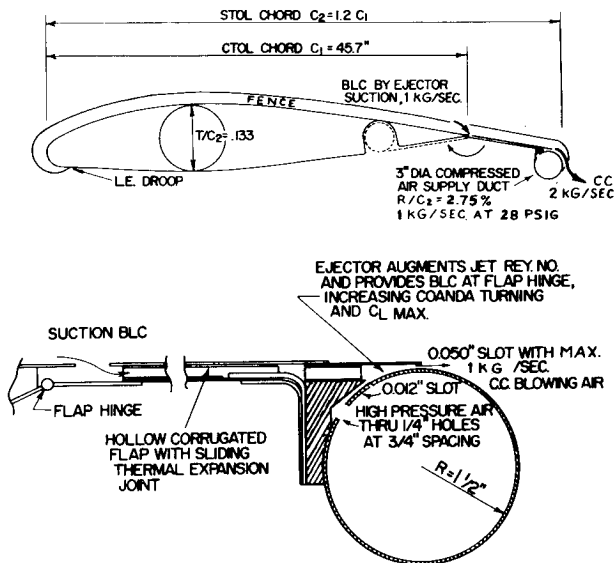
The WVU Technology Demonstrator Aircraft model B STOL wing design with forward folding, stowable flap.
